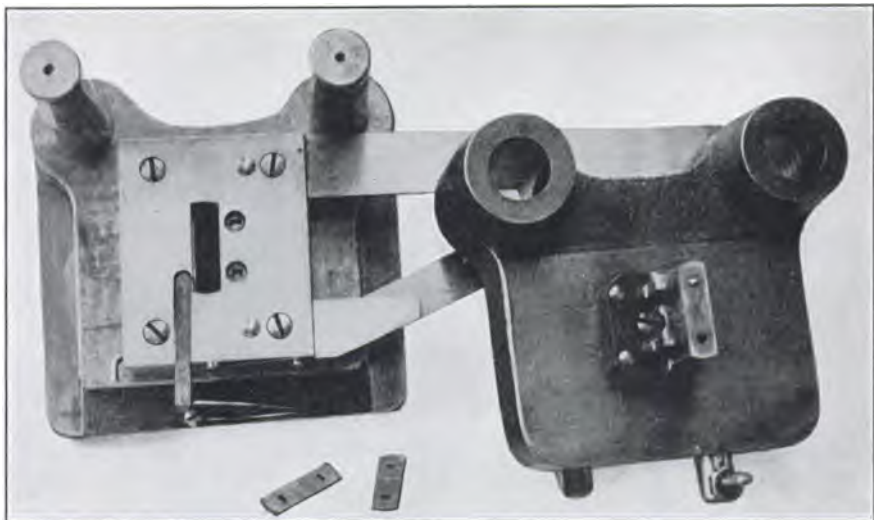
Progressive tools for piercing and blanking a rectangular part
